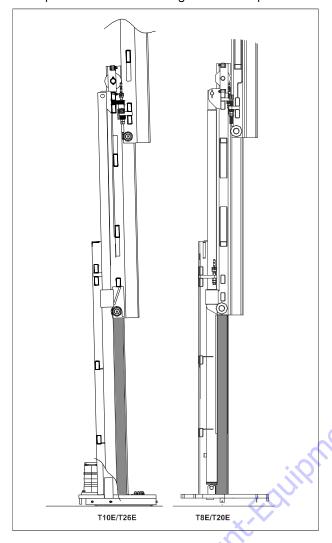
Supporting Mast Sections for Mast Cylinder Removal
